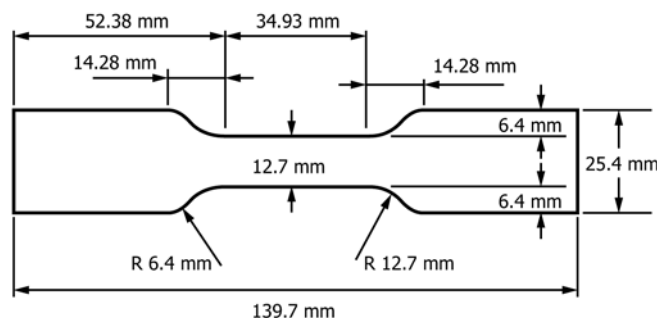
Die for Stamping Tensile Dumbbell Specimens—D3574 Die
